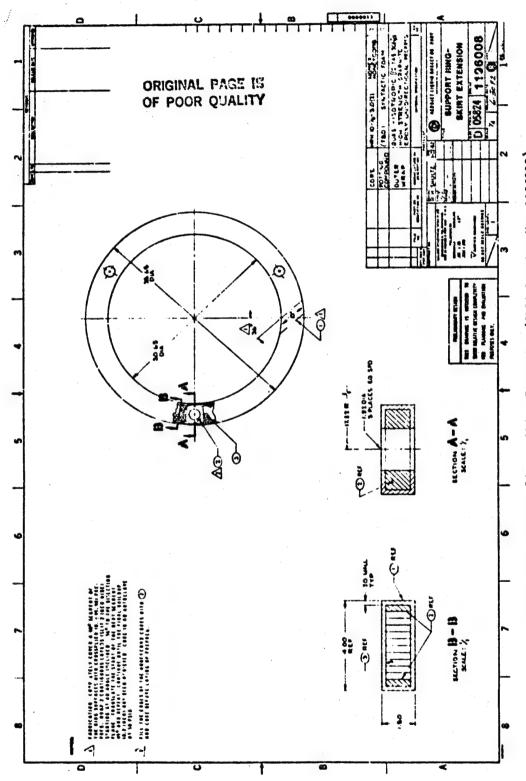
Support Ring - Skirt Extension (ALRC Drawing No. 1196008)
